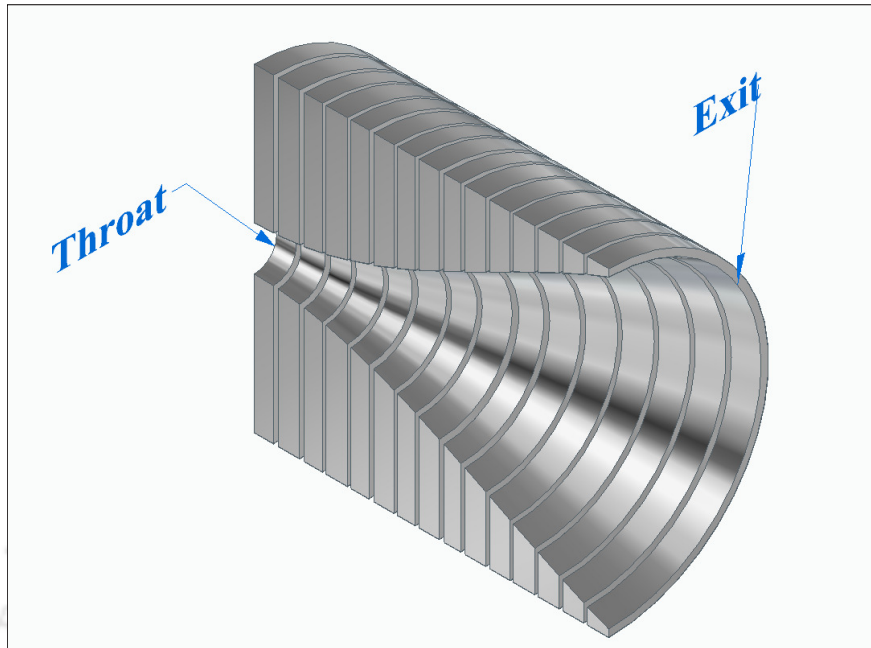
A 3D view of the ringed nozzle arrangement.
